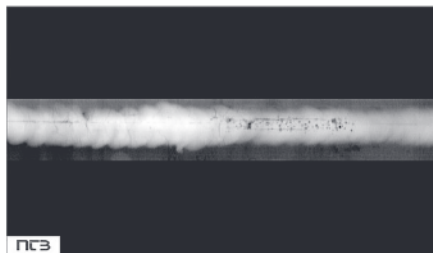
X-ray inspection of a weld showing defects.
